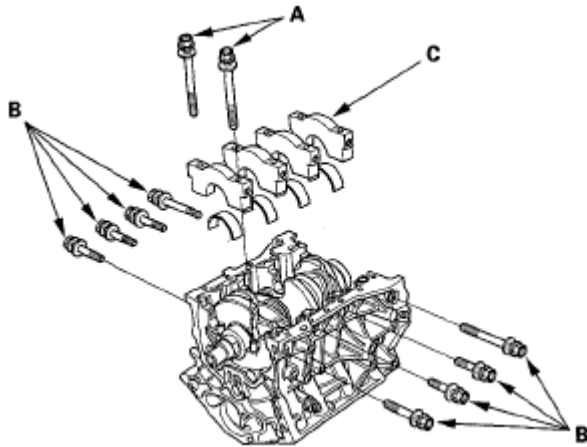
Identifying Bearing Cap Bolts, Bearing Cap Side Bolts And Bearing Cap
